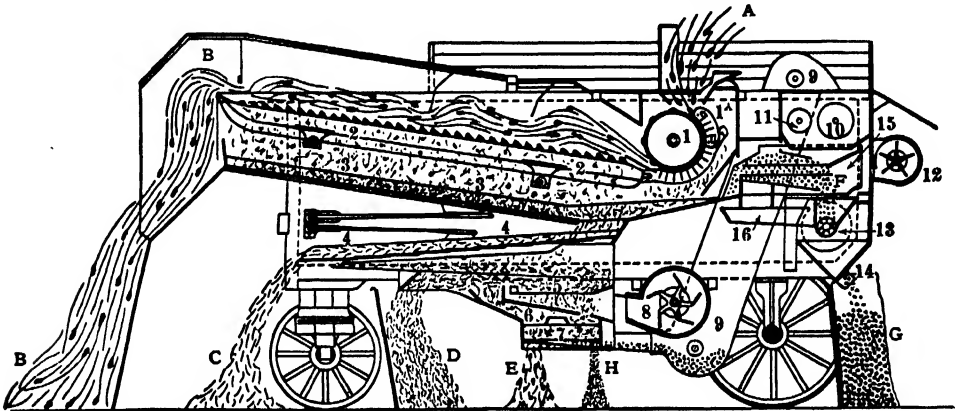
Sectional View of Finishing Threshing Machine (Brown & May, Ltd.)
